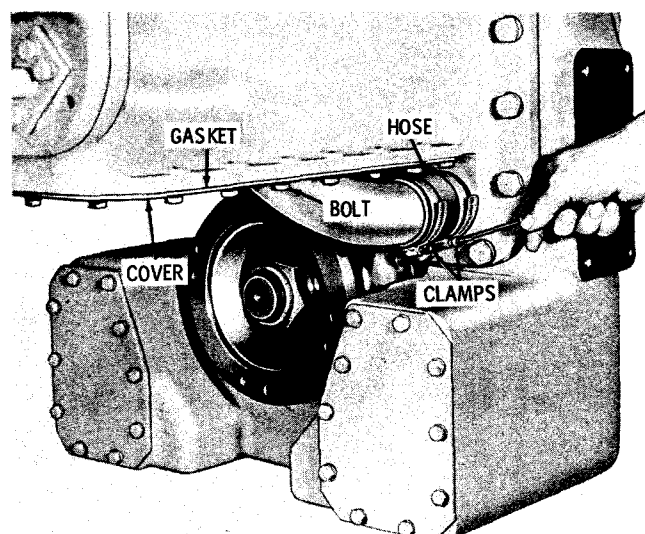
Installing transmission drain pan hose clamps (vertical transfer housing) S1763
